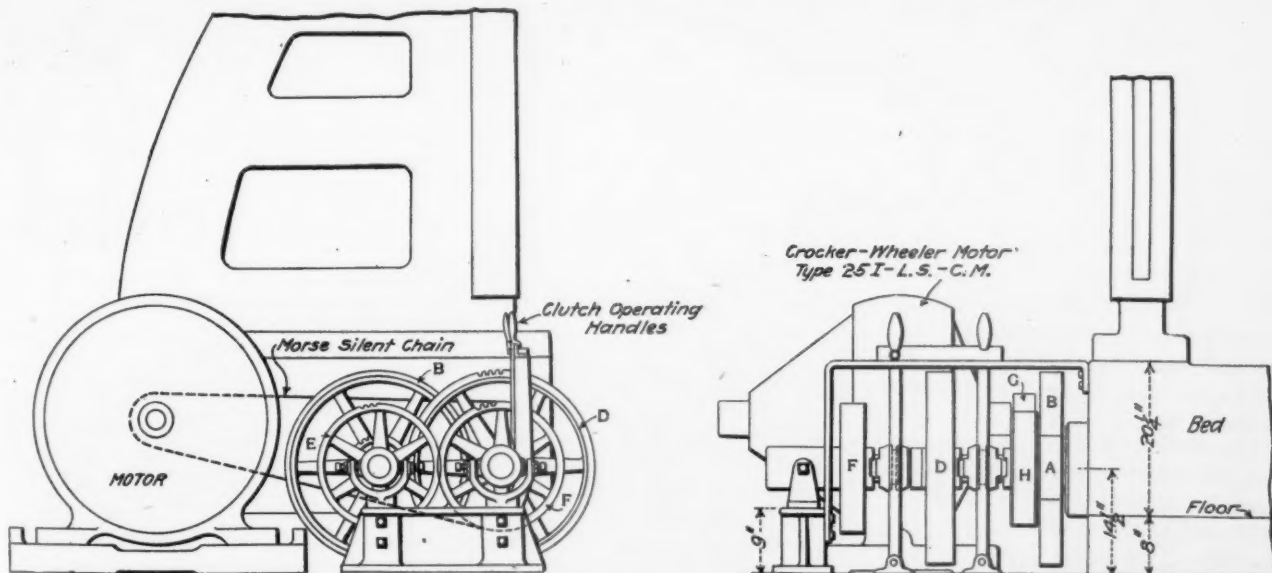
THE MOTOR DRIVING ARRANGEMENT FOR THE 72-INCH POND BORING MILL, SHOWING USE OF THREE GEAR RUNS AND INTERLOCKING LEVERS FOR OPERATING THEM.
